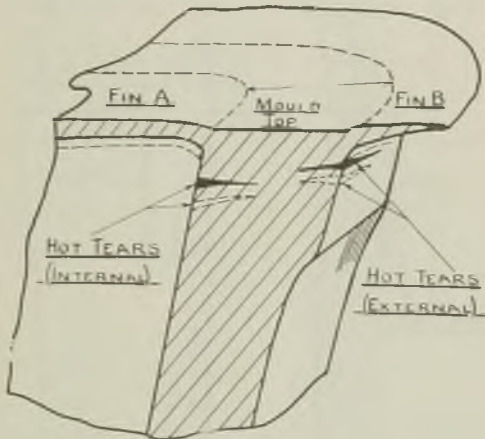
PART SECTION OF A MOULD CASTING AFTER COOLING.
